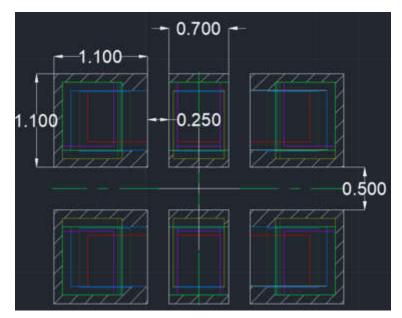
6-Pin, 3.2-mm × 2.5-mm DLE Universal Land Pattern Overlaid With 11 Device Footprints
